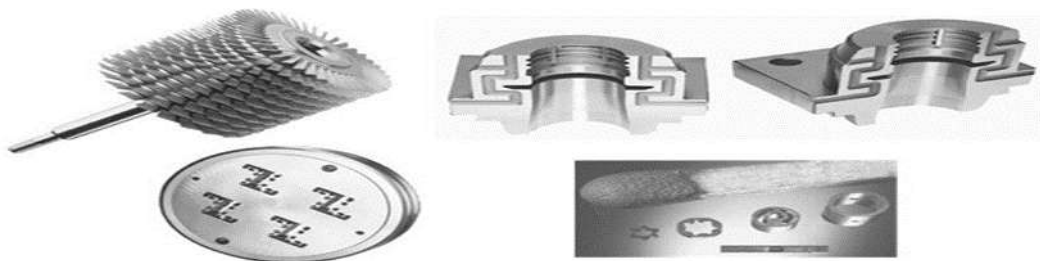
Examples of parts machined with EDM: high speed turbine and mold for the screw thread of PET bottles, produced by die-sinking.
